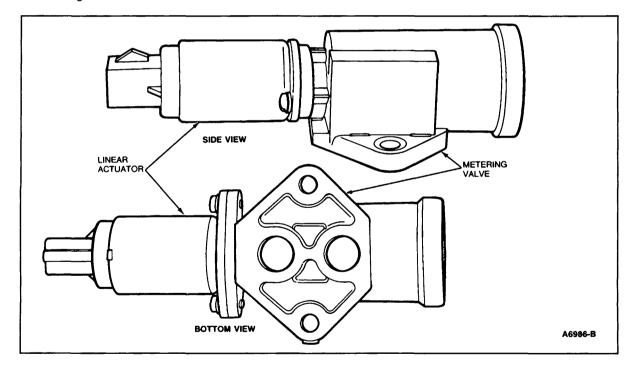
Air Bypass Valve Assembly — Connector May Be At An Angle
